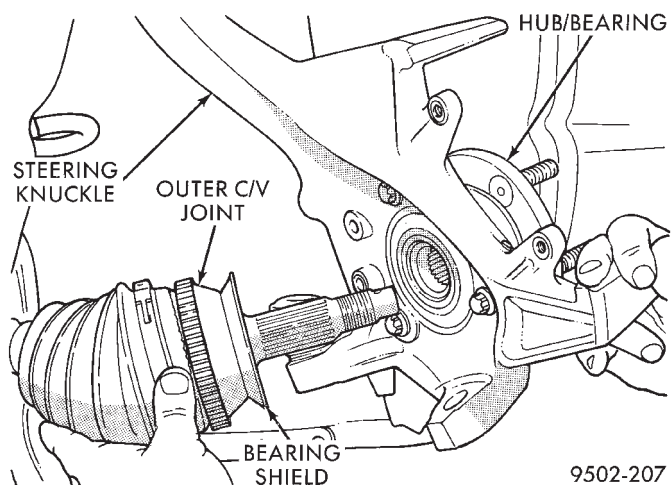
Separating Steering Knuckle From Outer C/V Joint
